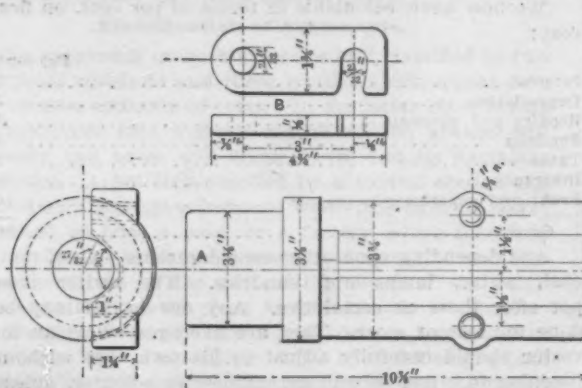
Fixture for Holding the Piece While Being Bored.
